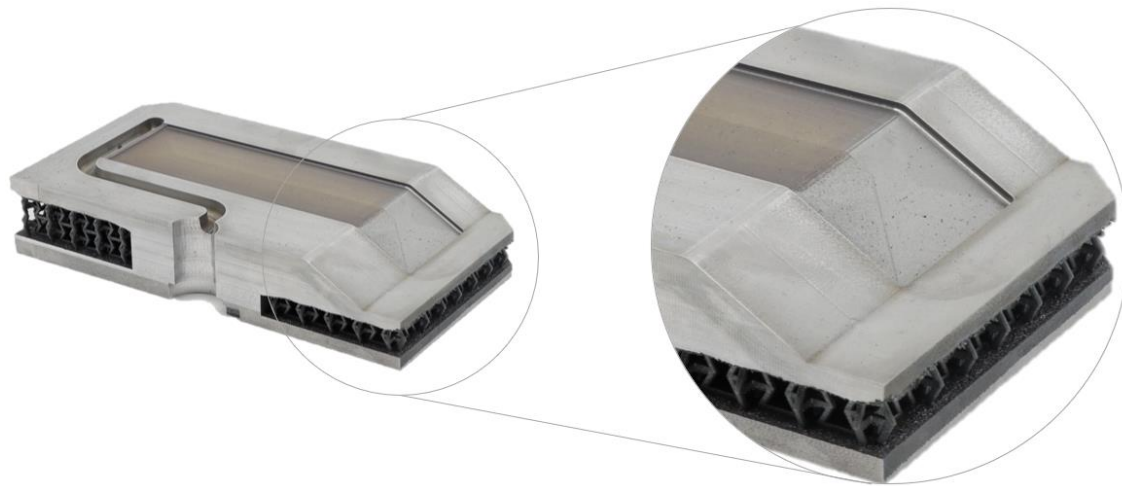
Detailed view of porous surface on the cavity produced by PBF, after machining.
